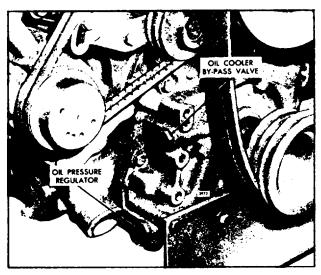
Location of Former Oil Pressure Regulator Valve -6V Engine Shown
